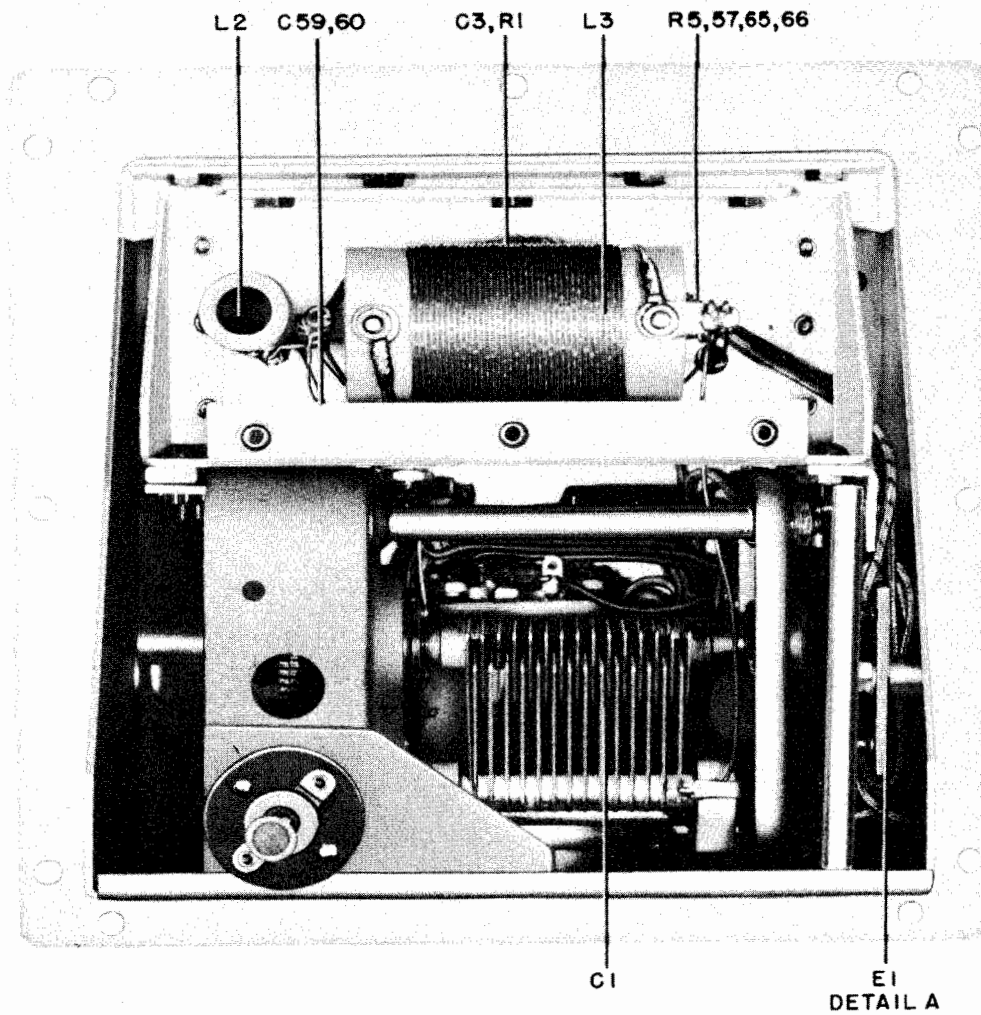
Inner Oven With Covers Removed, Location of Parts
